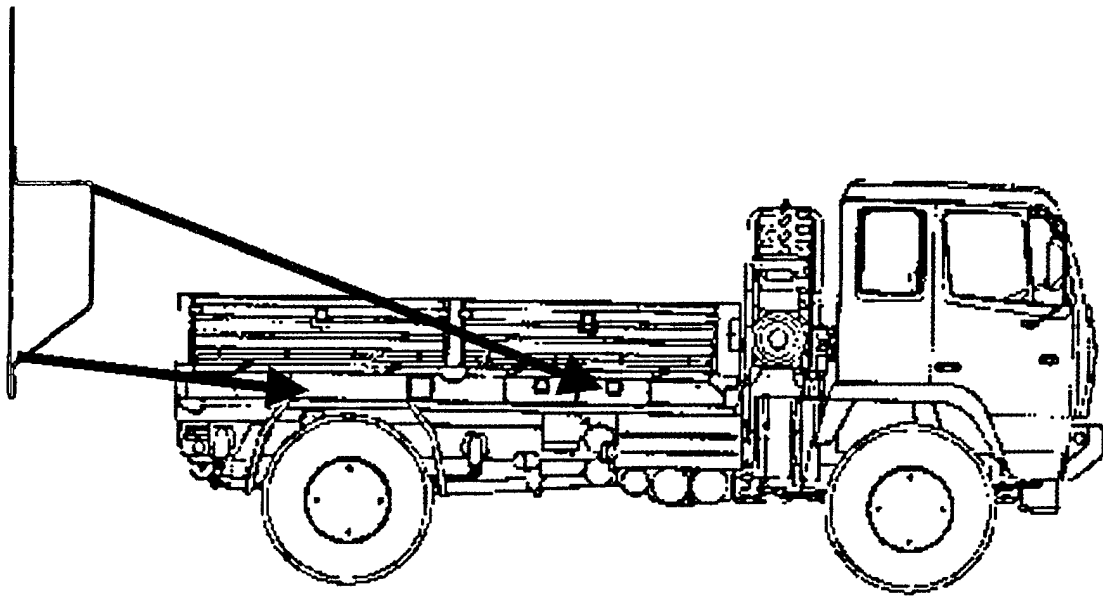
Test Vehicle Mounting Locations – 4 Specimens per Side
